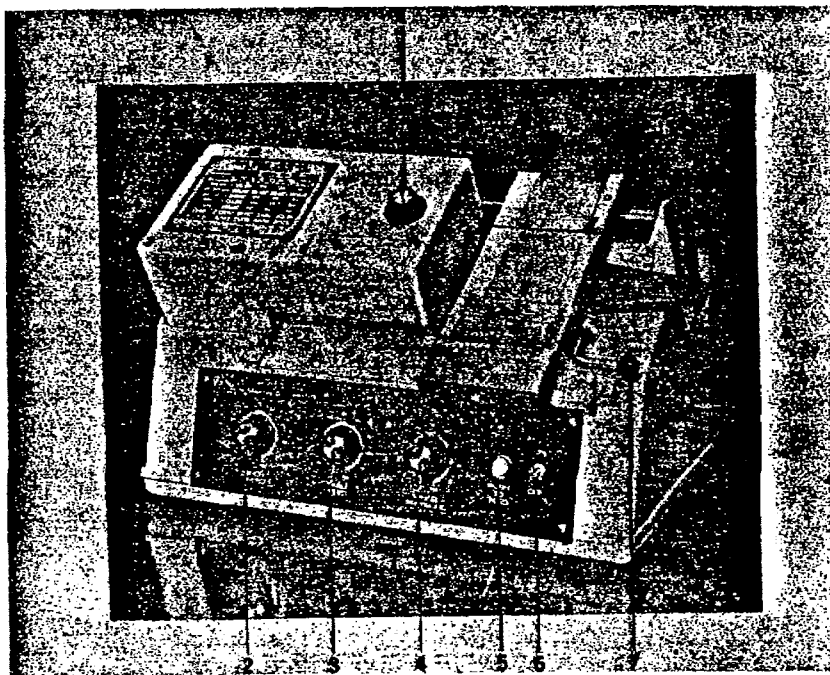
Abrasive wheel stripper (Viking Industries).
